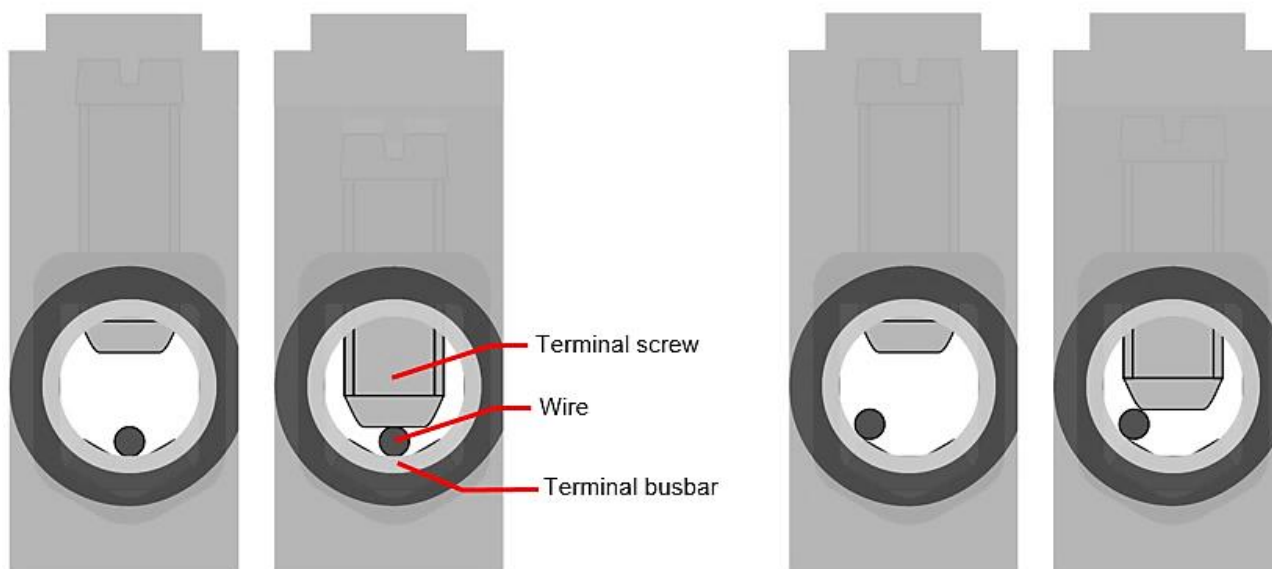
Properly inserting and fixing a cable with a 2.5 mm² wire cross-section in the main terminal
